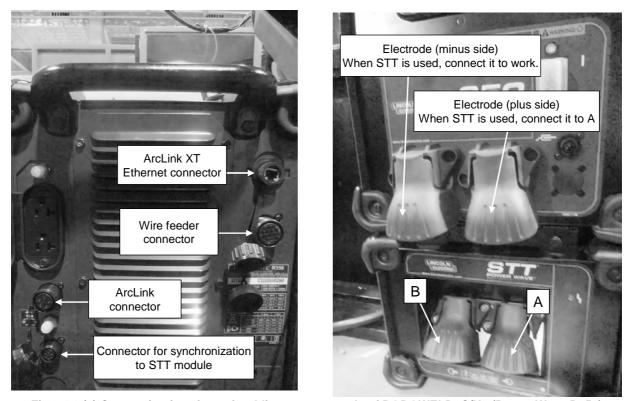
(e) Connection interface of welding power supply of ROBOWELD iC/H3 (Power Wave R350)
